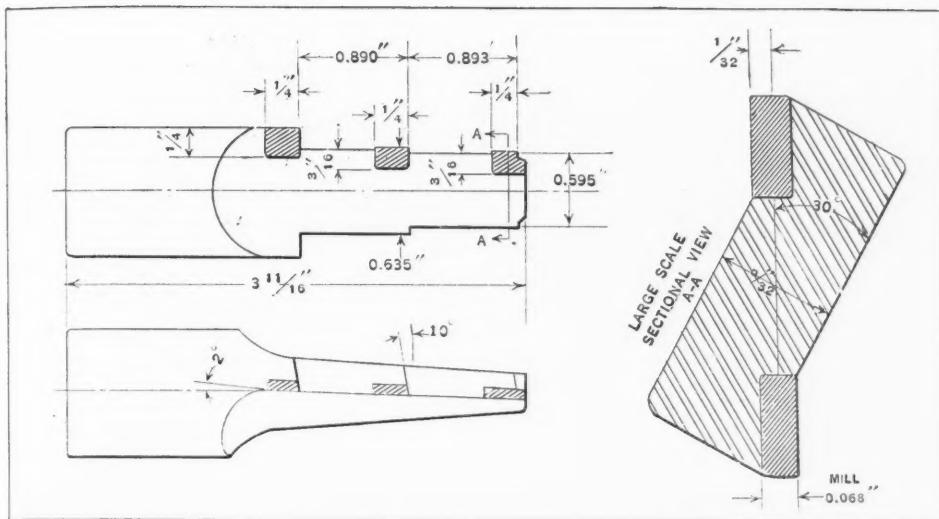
Boring Tool of Stepped Design for Machining Brass Tubes
